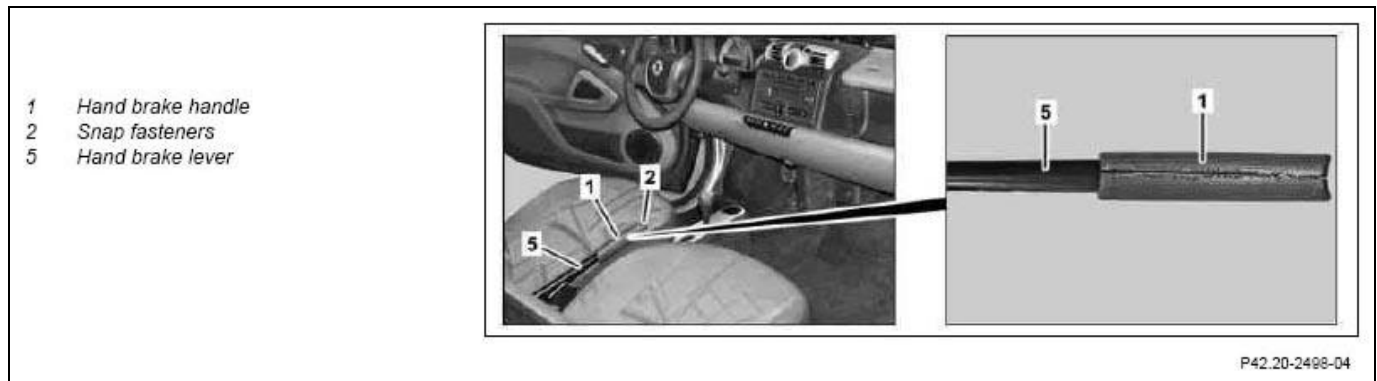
Identifying Hand Brake Handle, Snap Fasteners & Expansion Clip
